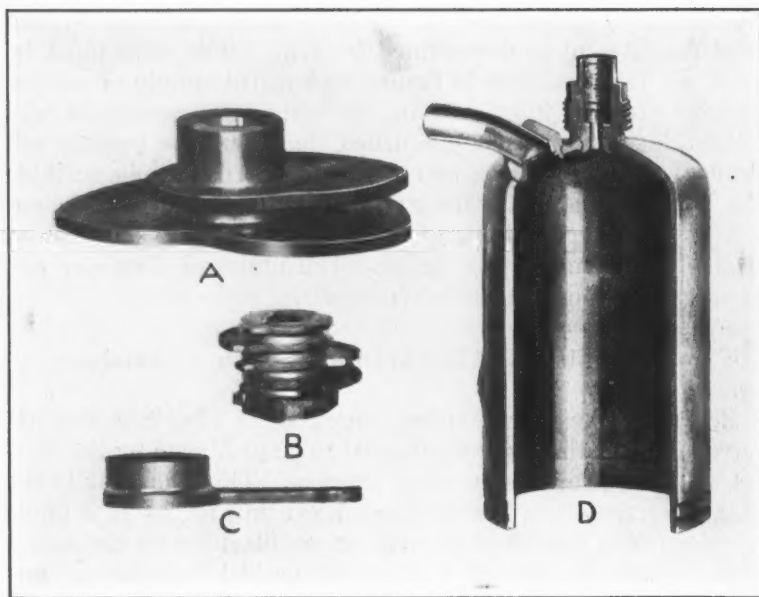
(A) and (B) Copper-brazed Cam-cluster Assemblies; (C) Hub and Lever of Brazed Construction; (D) Float Chamber with Section Cut Away to Show Brazed Joints
